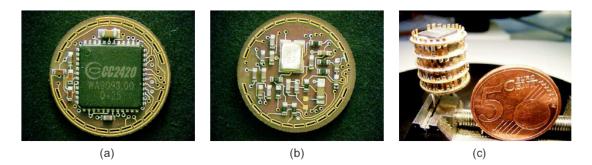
Photographs of (a) top view of the transceiver layer, (b) bottom view of the transceiver layer and (c) the manufactured prototype sensor
